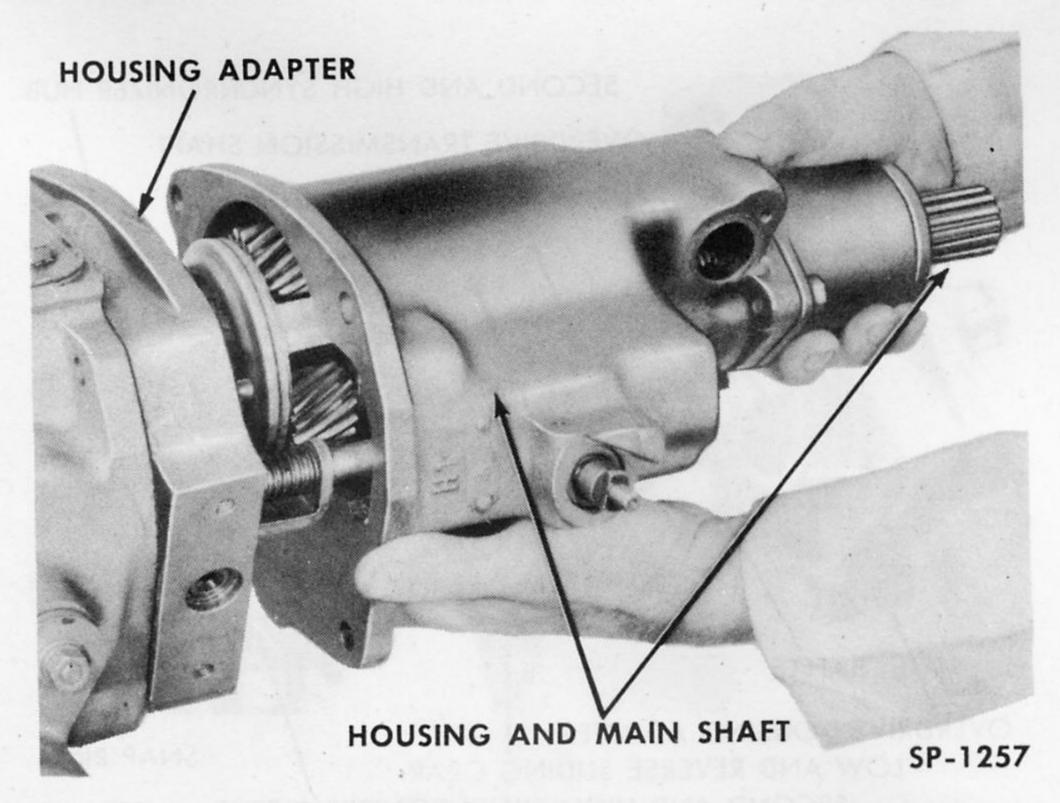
Removing Overdrive Mainshaft Assembly And Housing—Kaiser
